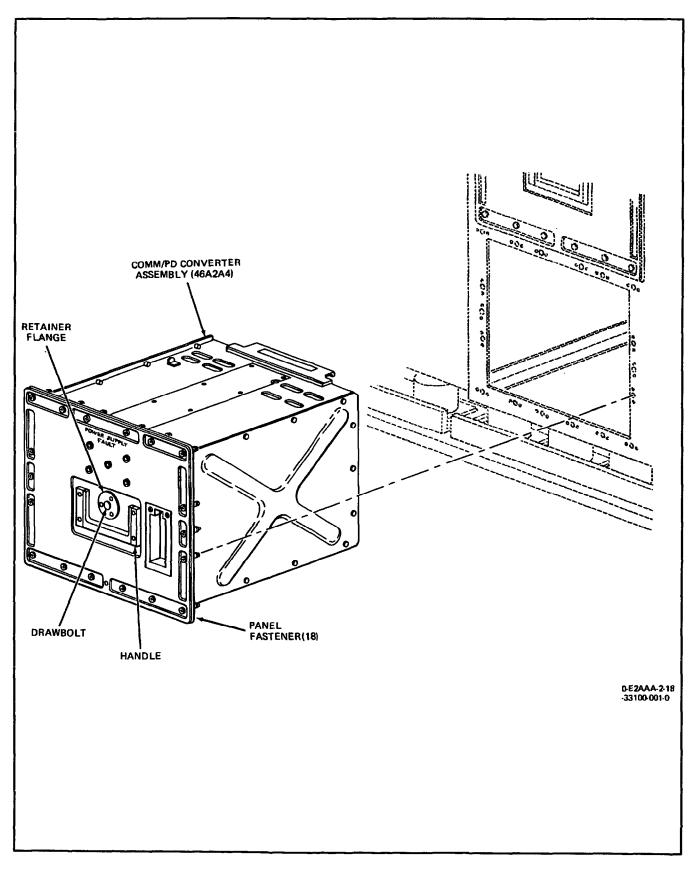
Removal and Installation of COMM/PM/PD Converter Assembly DDBC
